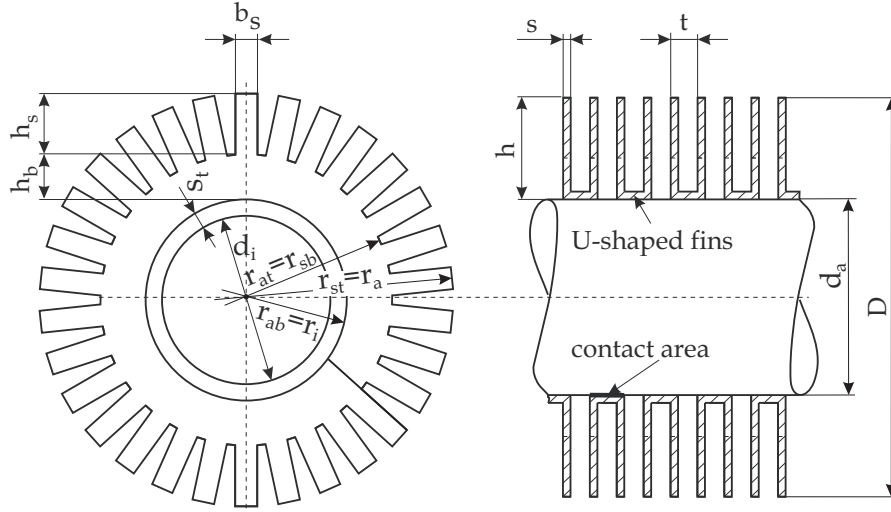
Sectional Sketch of the Investigated Finned-Tube with U-Shape
